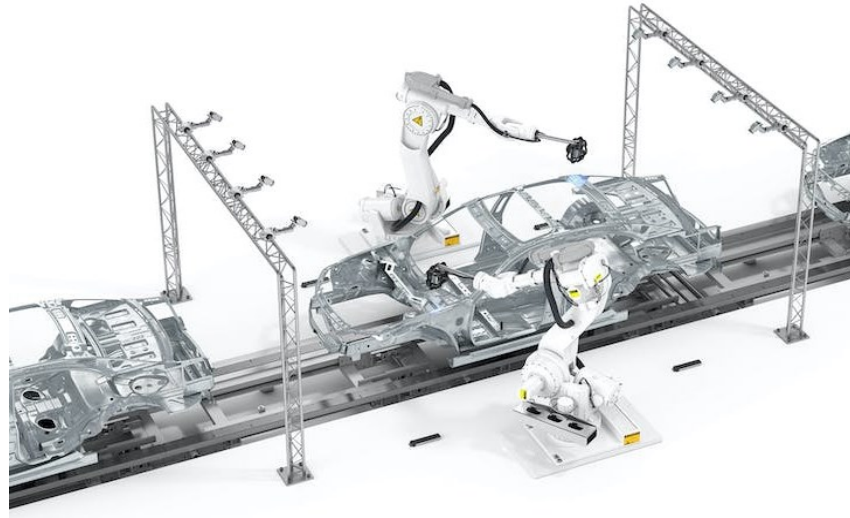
Collaborative optical inspection cell, photo by Z4tec. Example of robotic arm performing pick and place measurements [31].
